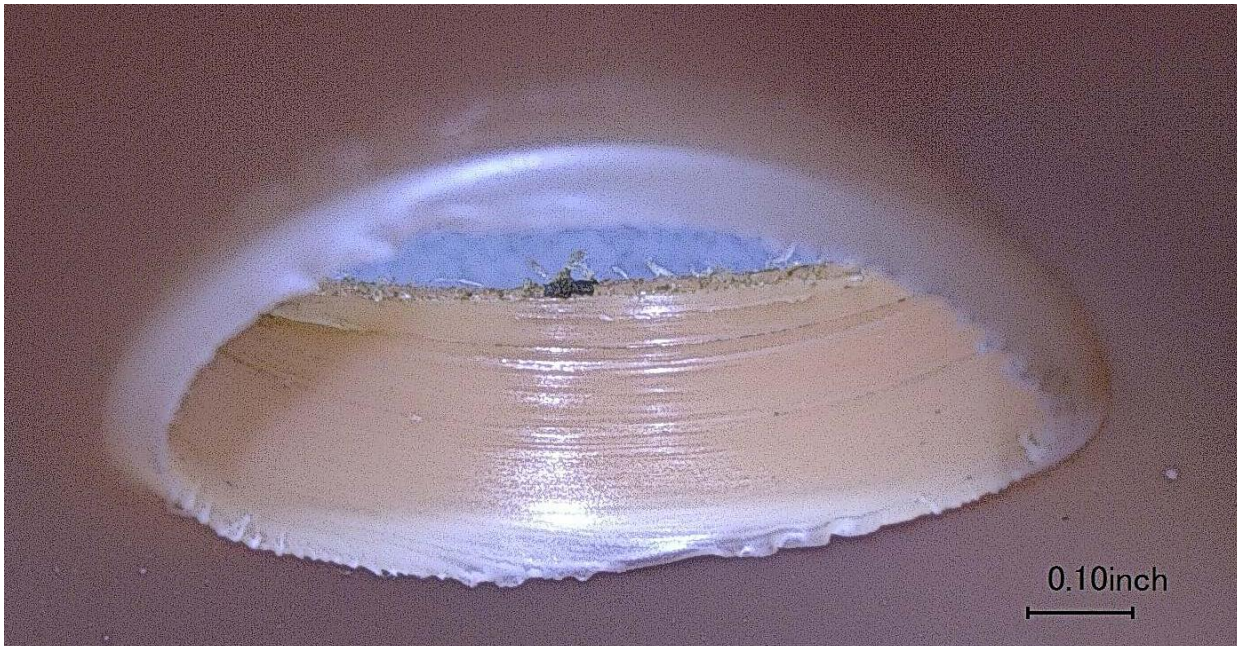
Photograph of the exposed inner surface of the main after disassembly of the tee showing the pierced hole made by the cutter tool. Note the fine circular cut marks within the pierced hole and the absence of threads.
